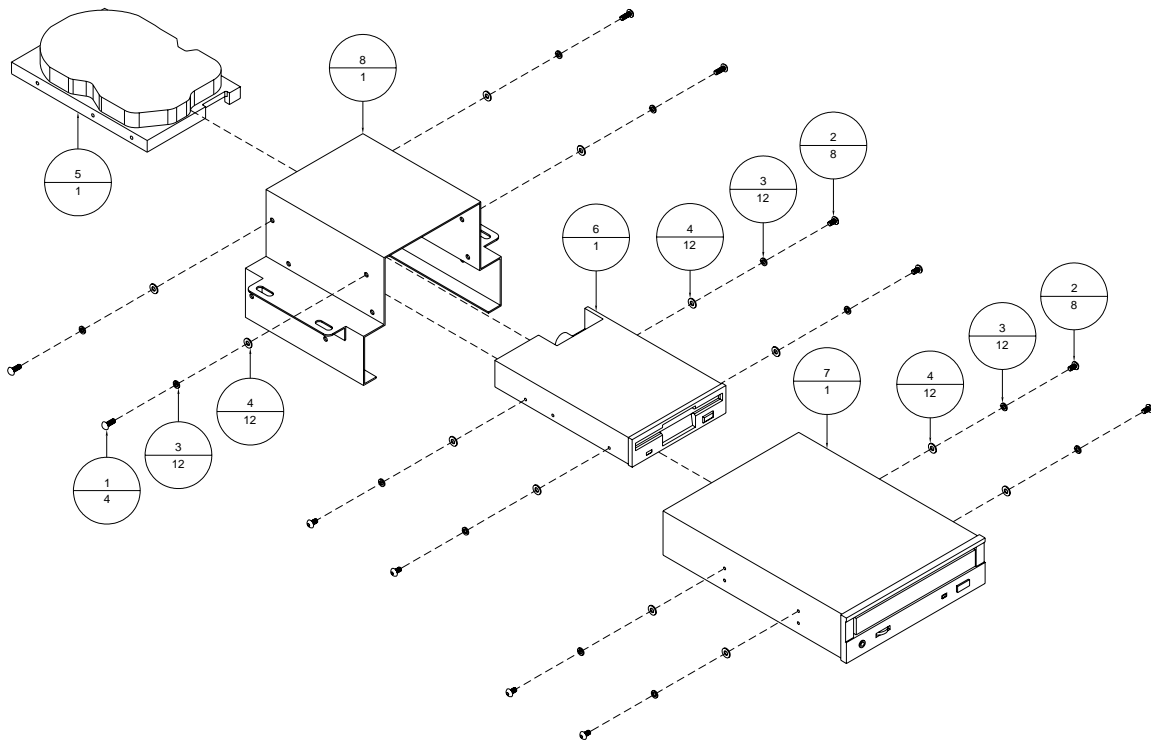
Computer Drive Mount Assembly (9102882A)
